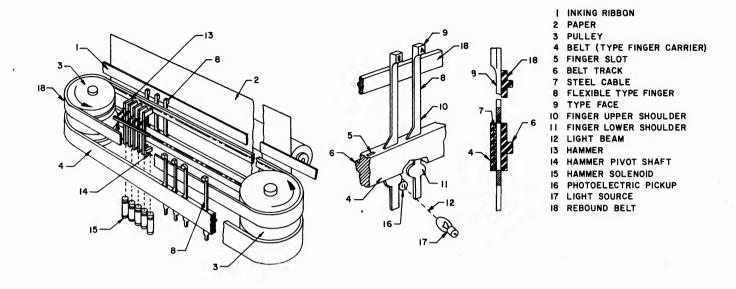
Hammer and Print Belt Assembly Parts Outline
